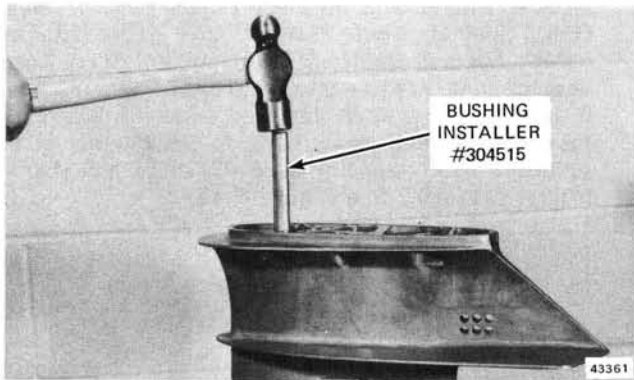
Installing Shift Rod Bushing, O-Ring and Washer
